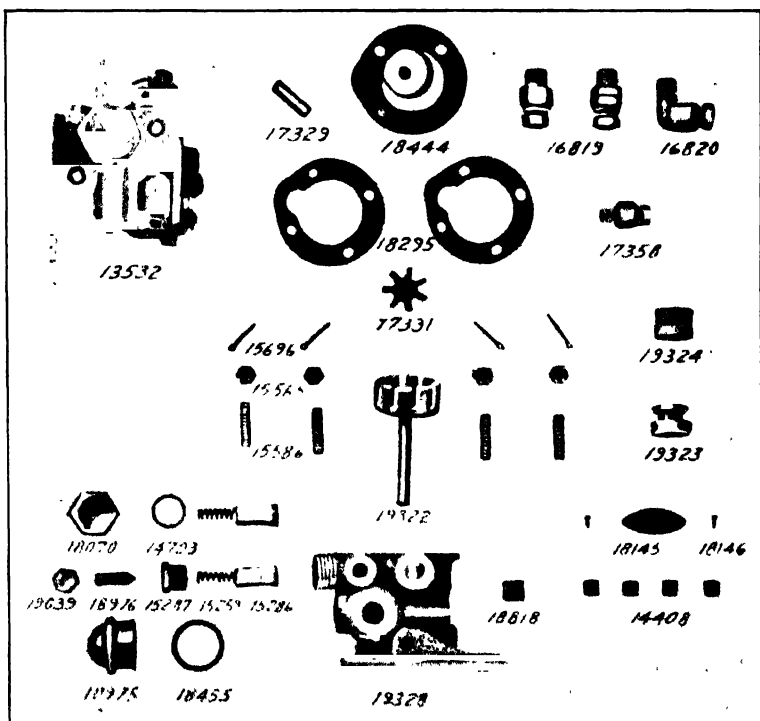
Wright J5 Fuel Pump Disassembled to Show Construction of Parts. Compare this with Assembly Drawing at Fig. 569.
